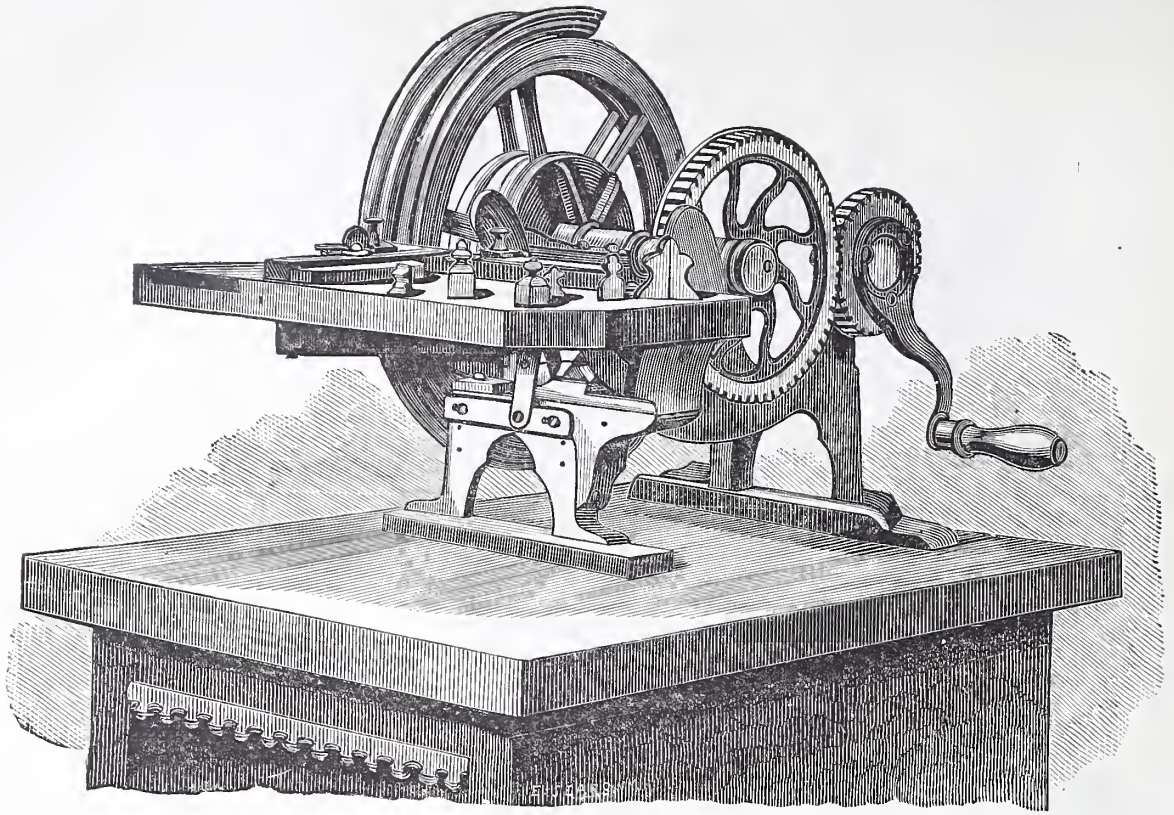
MACHINE FOR DECORATING MOLDINGS.
